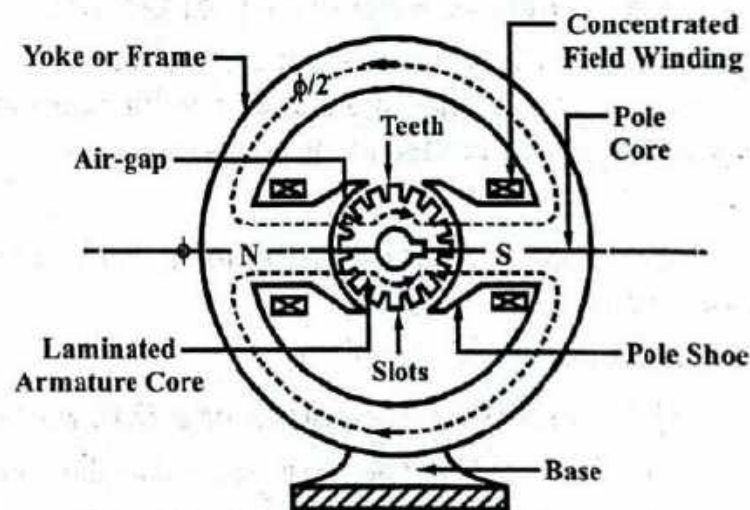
The Constructional Detail of a 2-pole D.C. Machine
